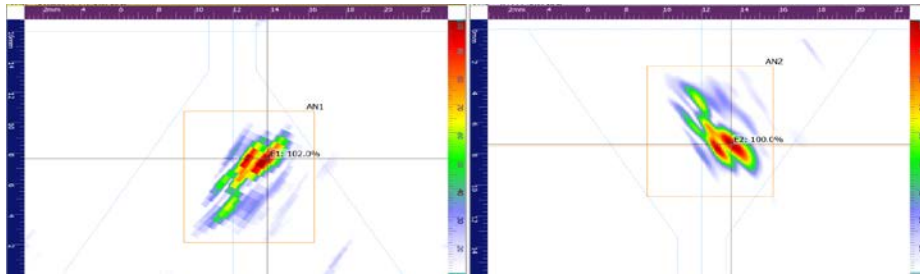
Representation of a butt weld acquisition using FMC/PA solutions
